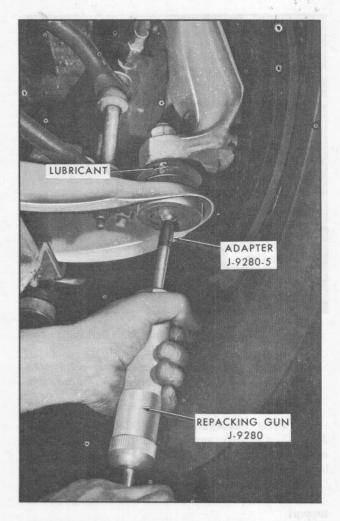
Repacking Front Lower Spherical Joint Seal
